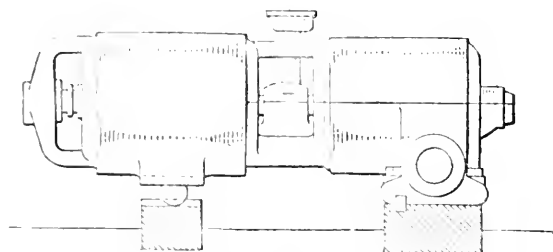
RIGID-FRAME DESIGN TURBINE AND PUMP
